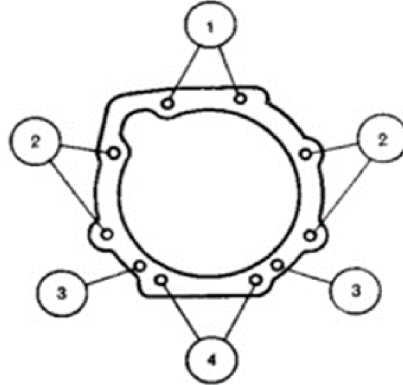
When reinstalling engine to transmission housing, tighten bolts shown at locations in drawing to the following torque specifications:
